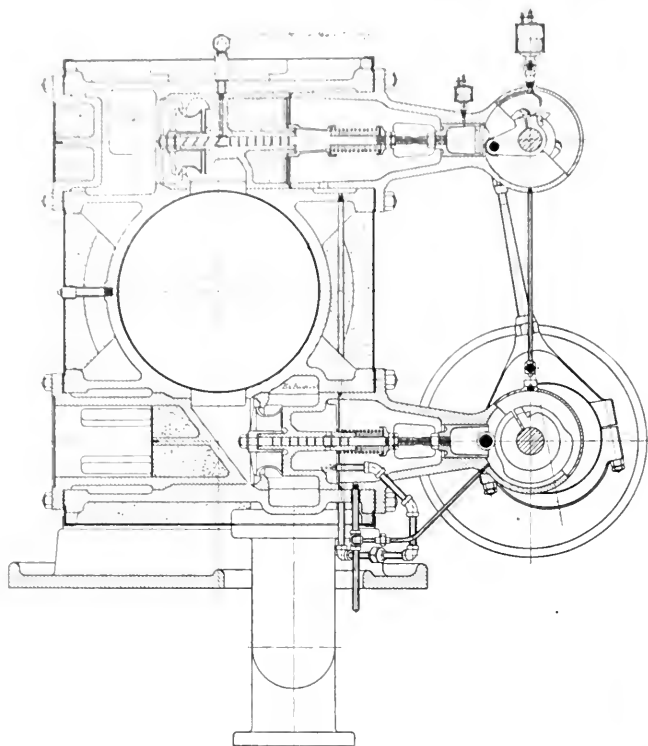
STEAM VALVES AND VALVE MECHANISM
